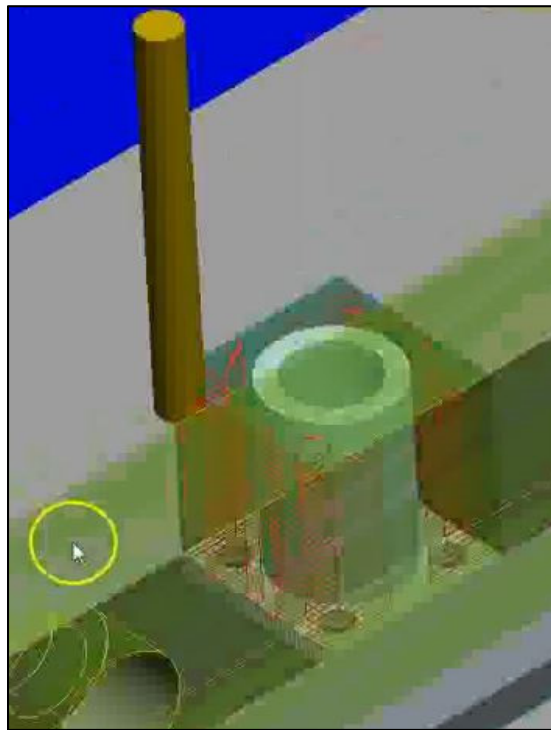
Creo CNC Tool path Rendering for Bearing Block Part.
